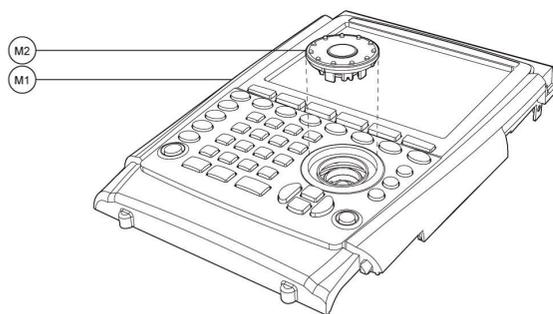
Remove FRONT ROTARY out of the FRONT MODULE
